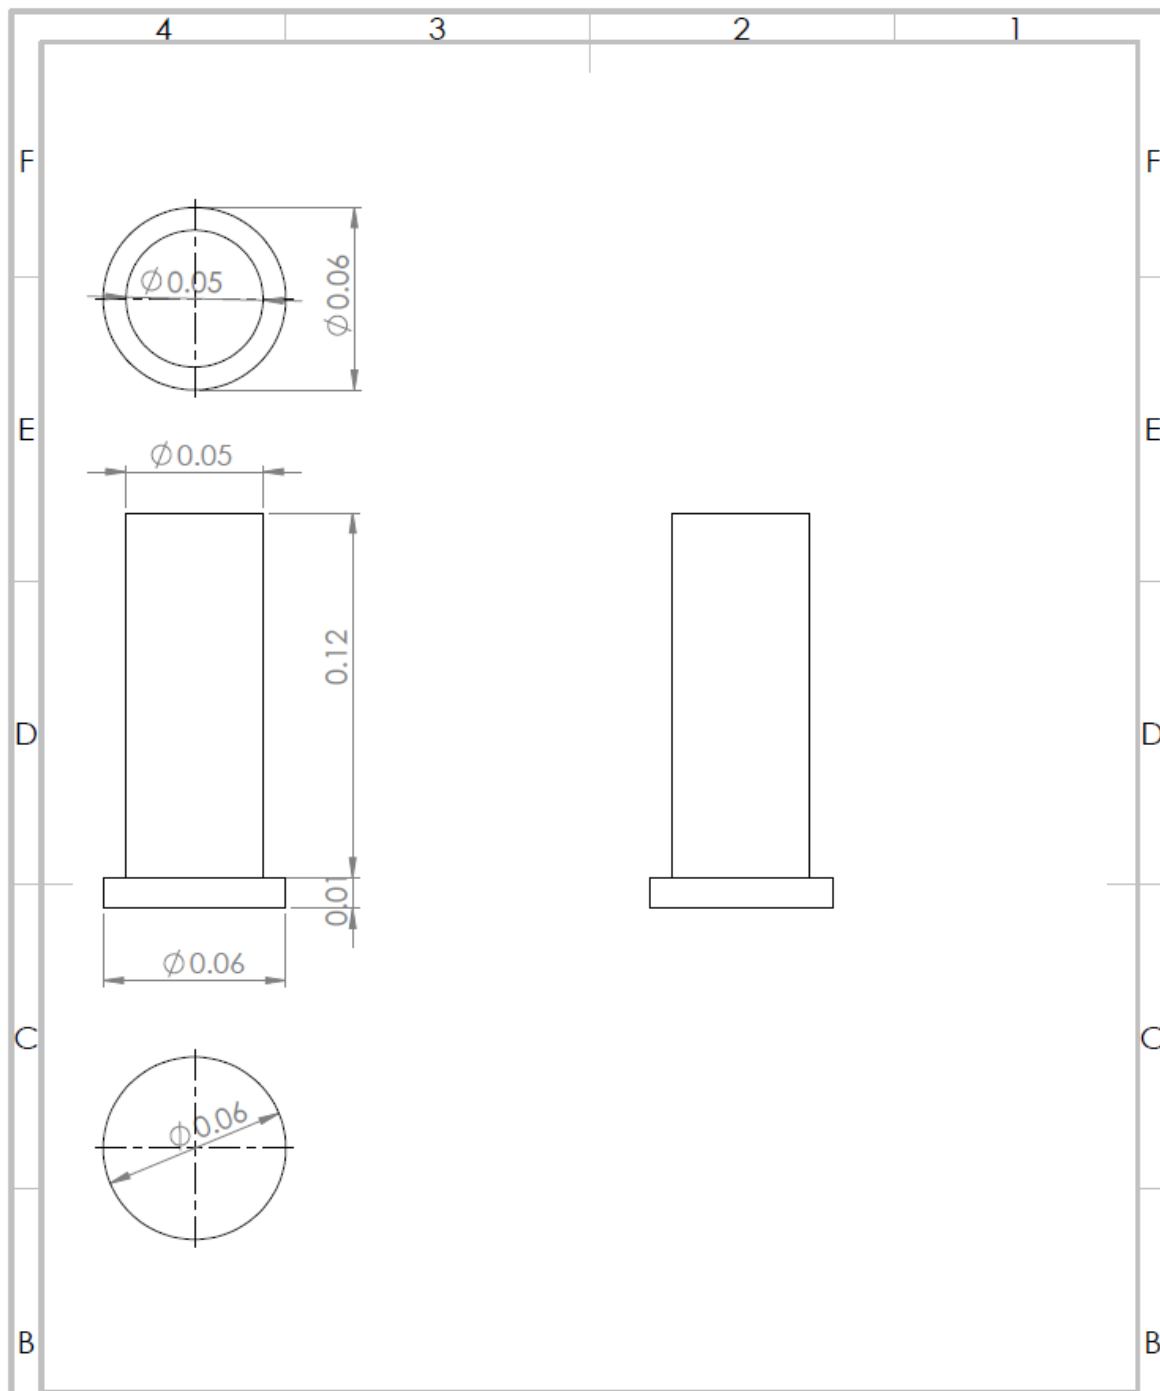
Dimension of Universal Joint (Supporting Pin)
